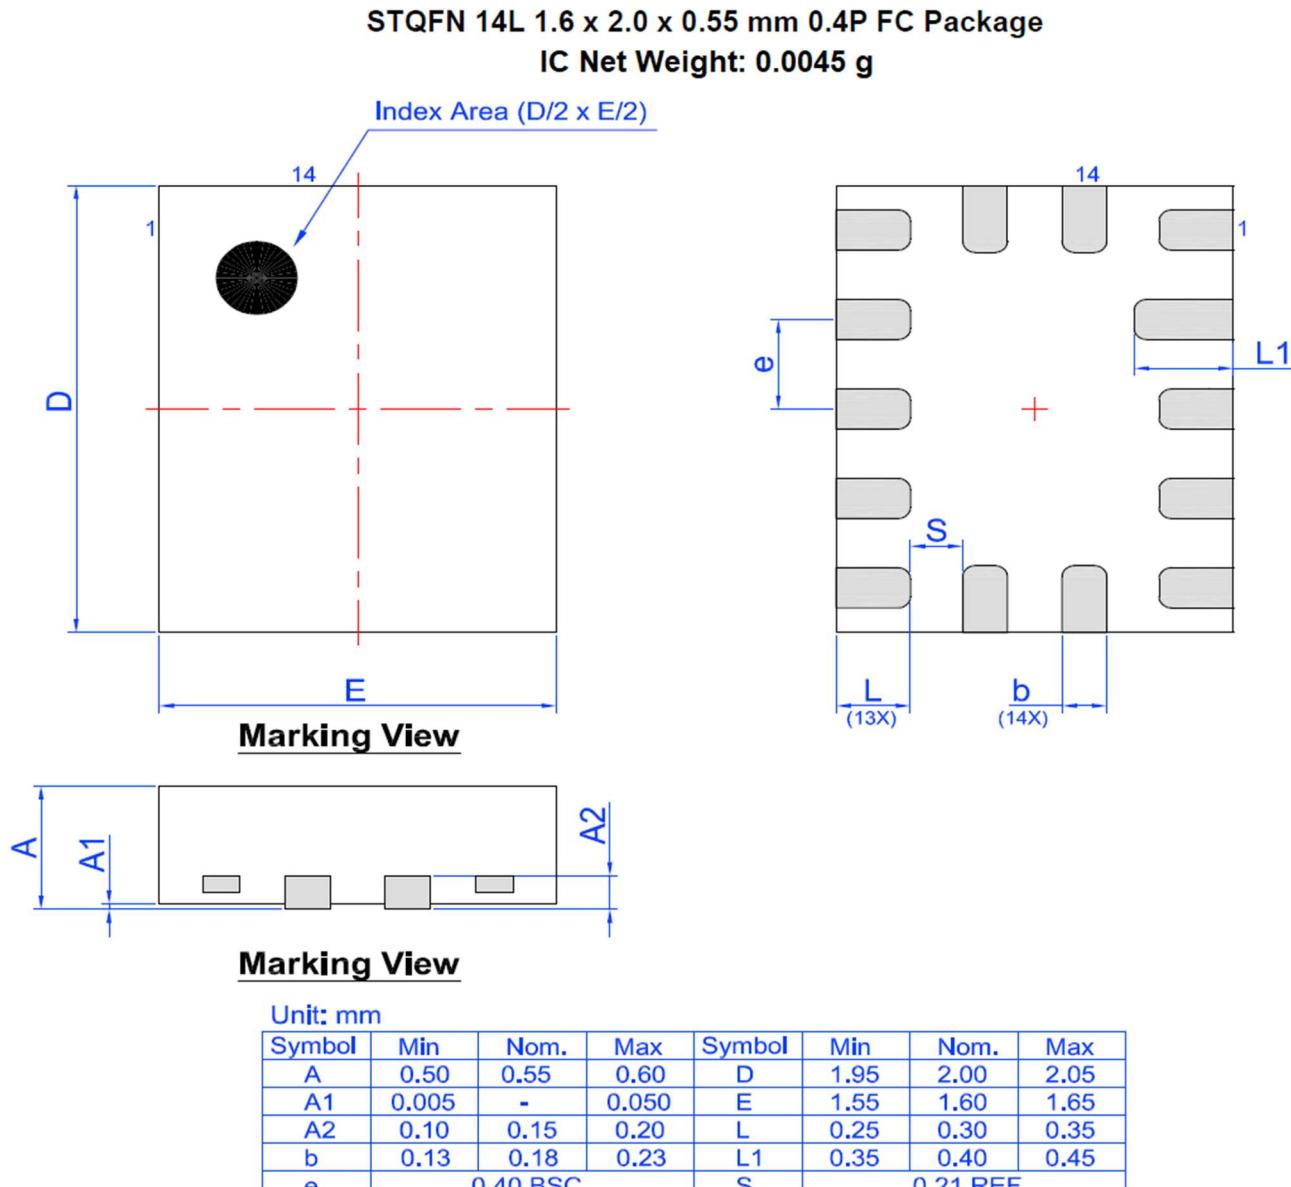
SLG4AX42396 Package Drawing and Dimensions
